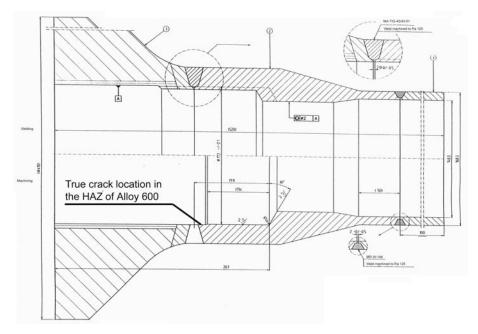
Drawing of the core spray nozzle and location of the produced crack in Inconel 600 safe-end in the heat affected zone of the buttering weld.
